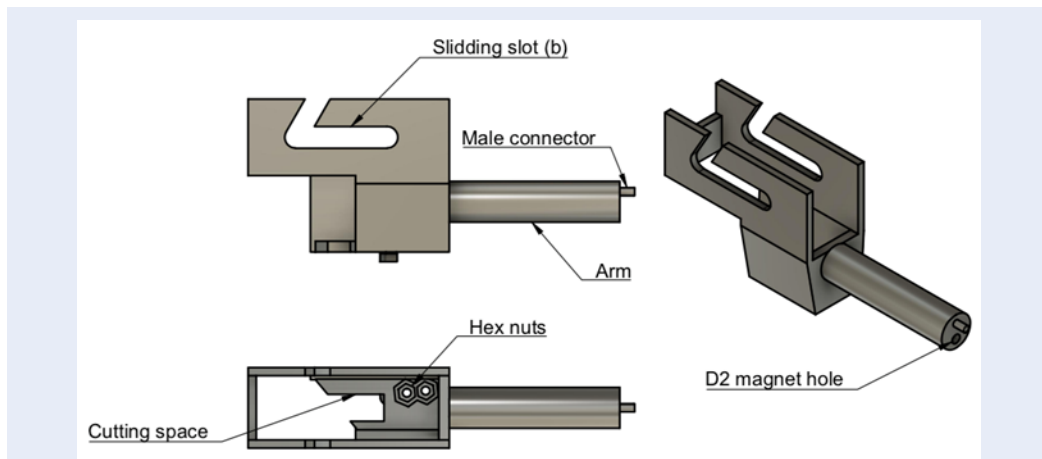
Front, Top, and Perspective views to illustrate the structural design of the cutting frame with sliding slot (b) with an acute angle of 60°, cutting space, M2 hex nuts to secure the cutting blade, cylindrical arm moving in the main frame’s sliding slot (a), male connector and D2 magnet hole.
